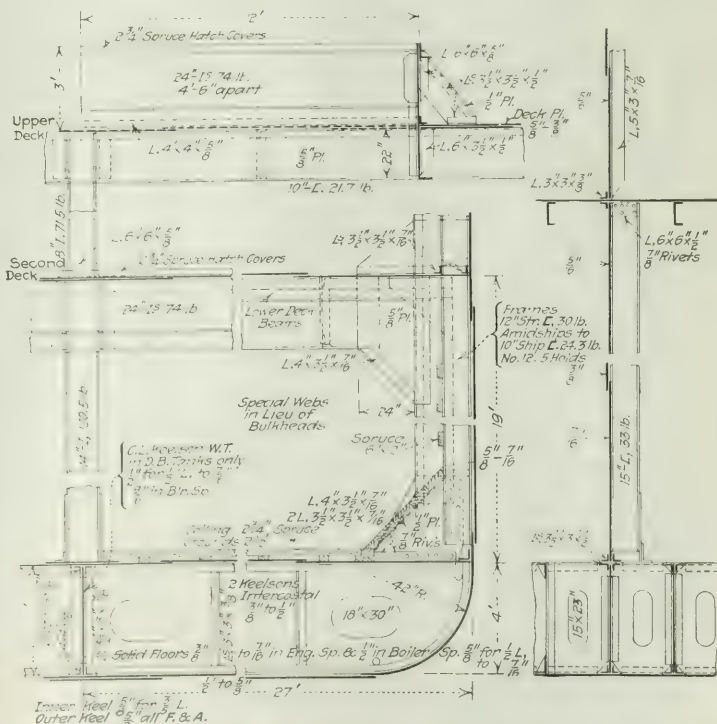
MIDSHIP SECTION HAS DETAILS OF BRIDGE AND STRUCTURAL TYPE
